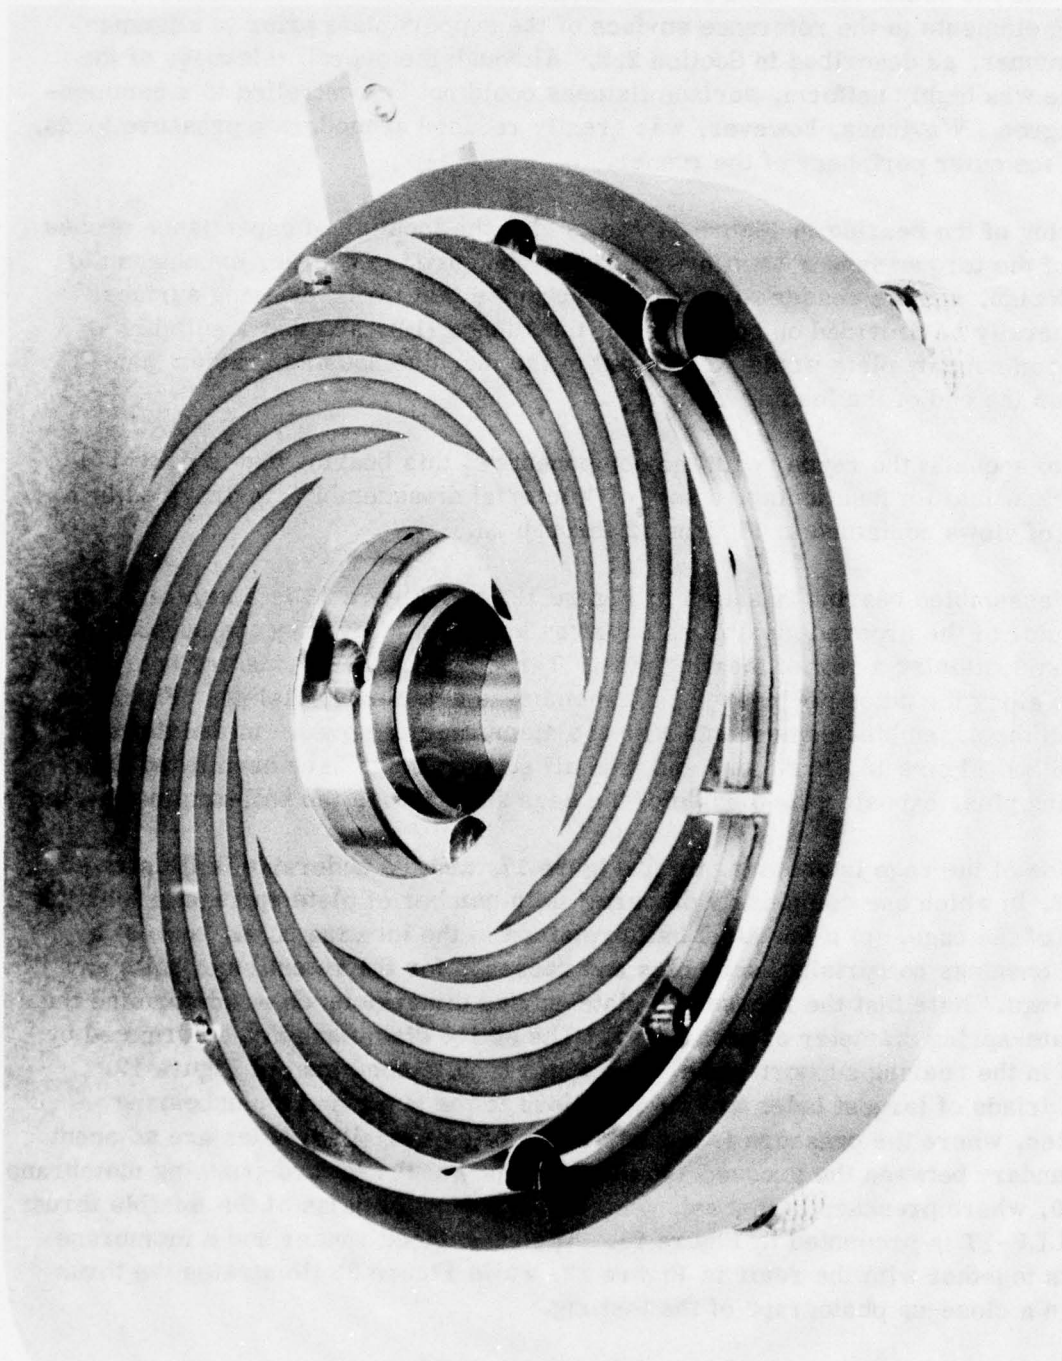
VIEW OF ASSEMBLED FLEXIBLE THRUST BEARING LLF-1T
